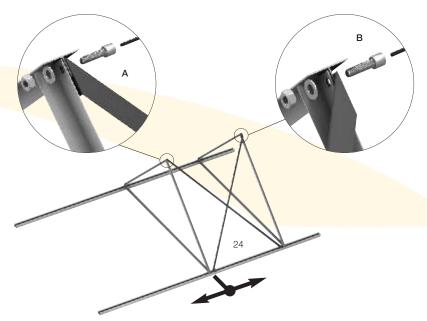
Installation of the Second Flat Roof Mounting Bracket
